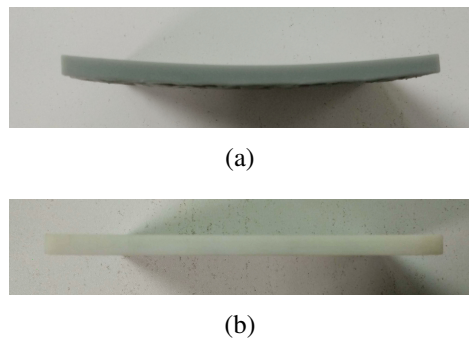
Warping in rectangular X-band filter prototypes printed with different materials: (a) filter printed with grey resin from Formlabs, (b) filter printed with Rigid 10K resin from Formlabs. Both filters were manufactured under similar conditions, using a Form 2 printer from Formlabs.
